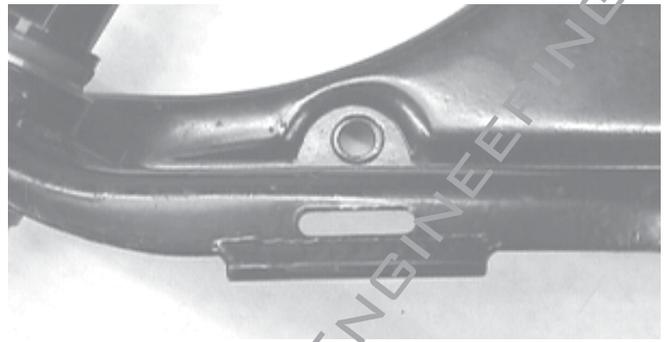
A shot of the reinforcement applied to the sway bar attachment point. This is a 1/4" diameter rod that is welded to bridge the slot to prevent the mounting clip from shearing the edges of the slot. Used properly, this modification will hold a 1" diameter sway bar.
